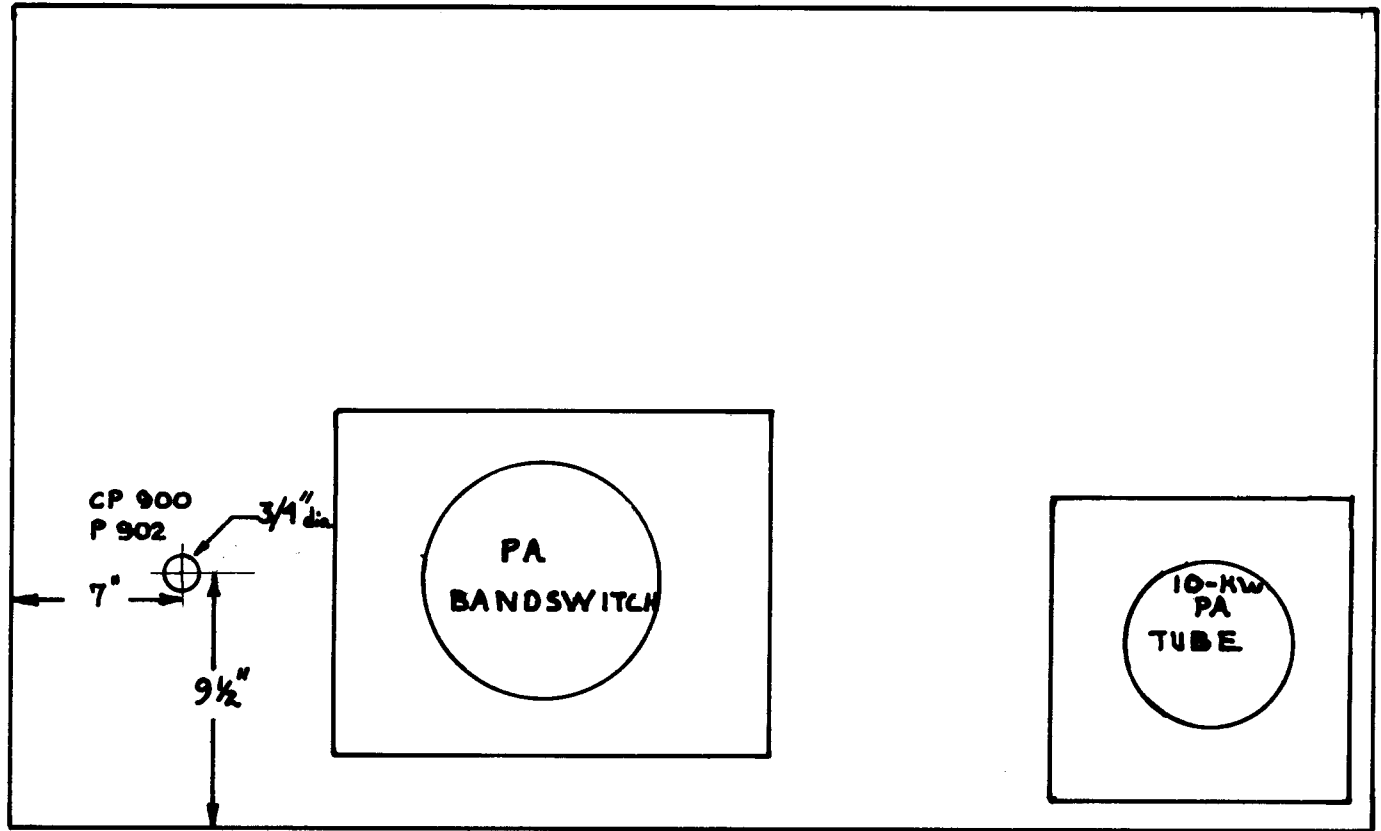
MAIN FRAME PA CHASSIS, TOP VIEW
